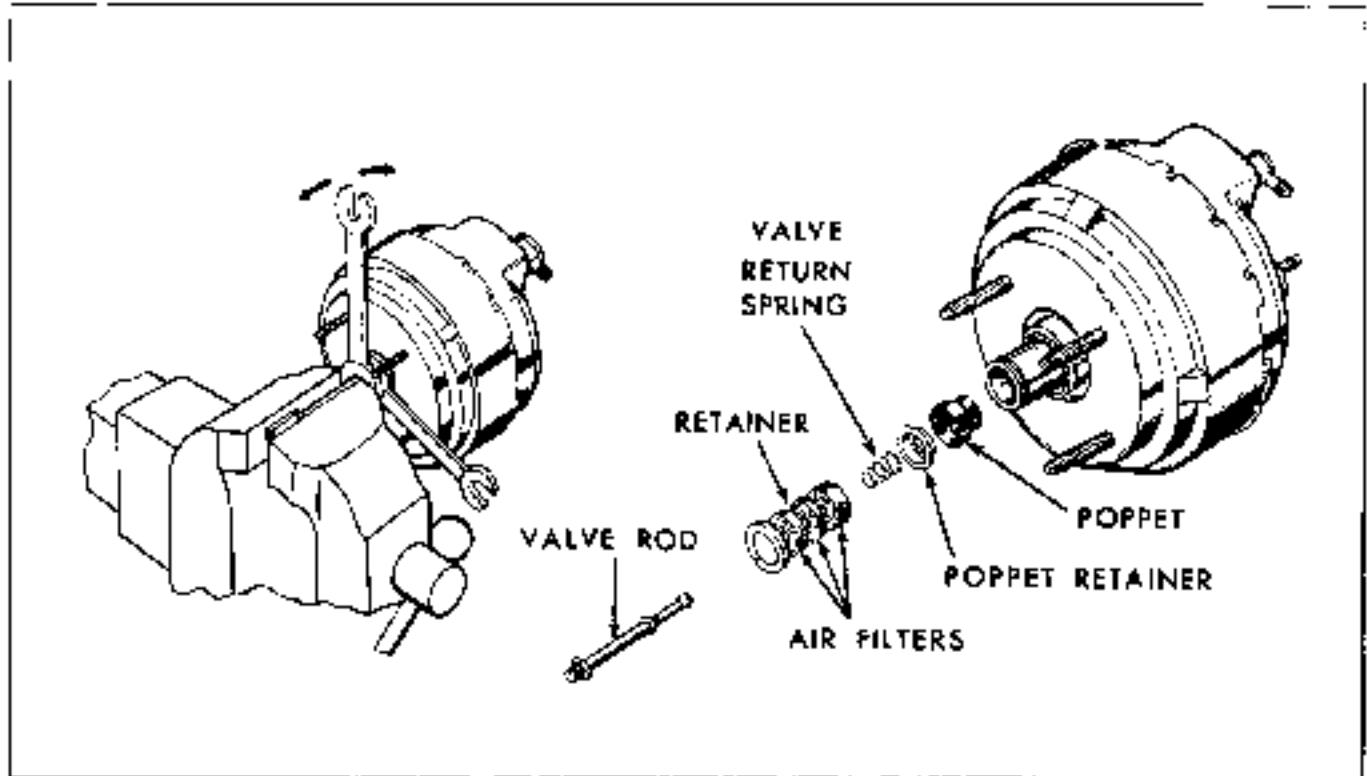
C-2 Valve Rod, Retainers, Filters and Poppet
